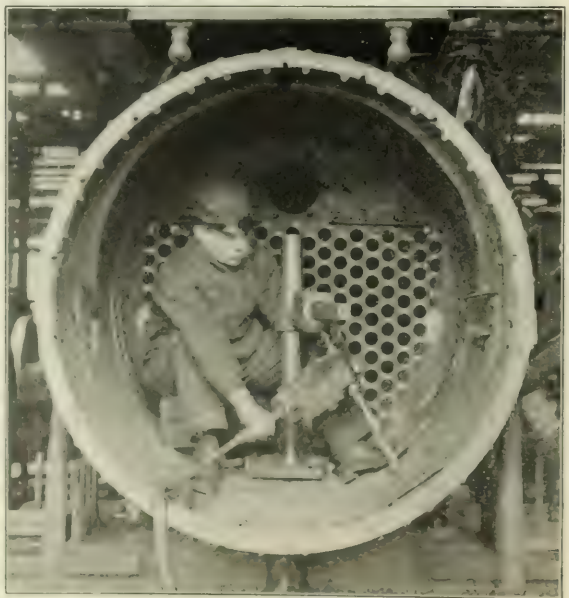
“Old Man” with Ball-Shaped Head for Drilling Saddle Bolt Holes.
